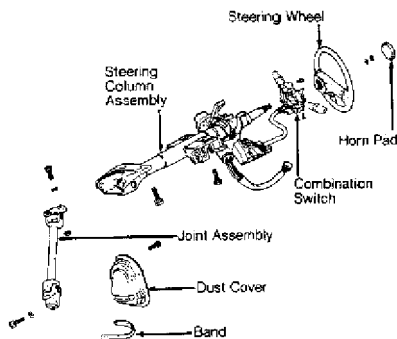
Exploded View of Steering Column Assembly (Precis)
